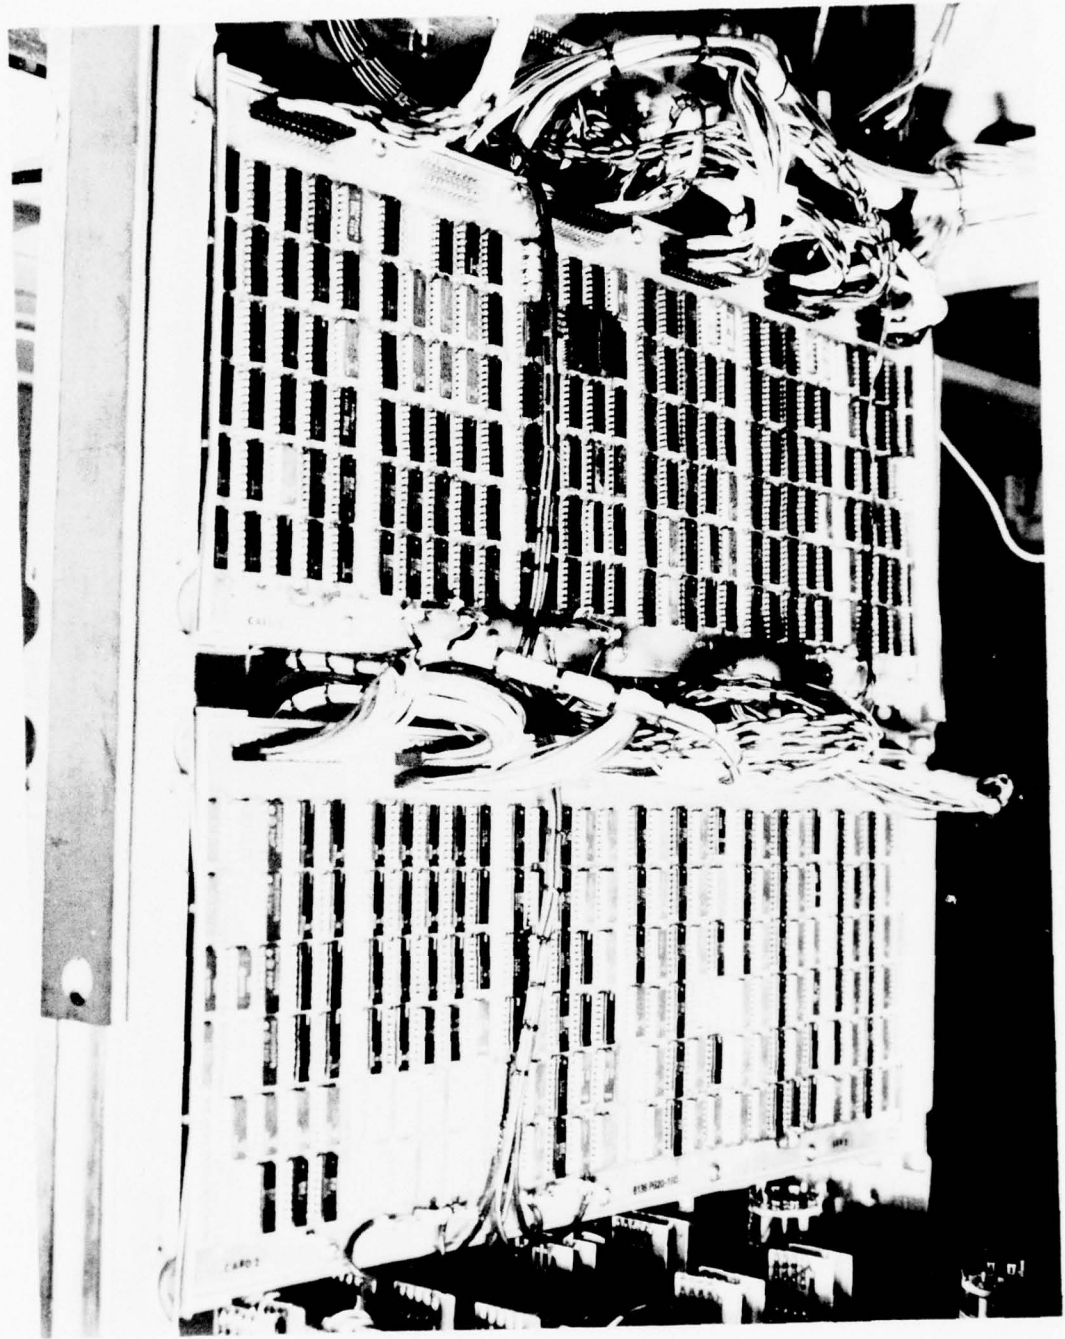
Scan Conversion Processor - Bottom View of Top Drawer
